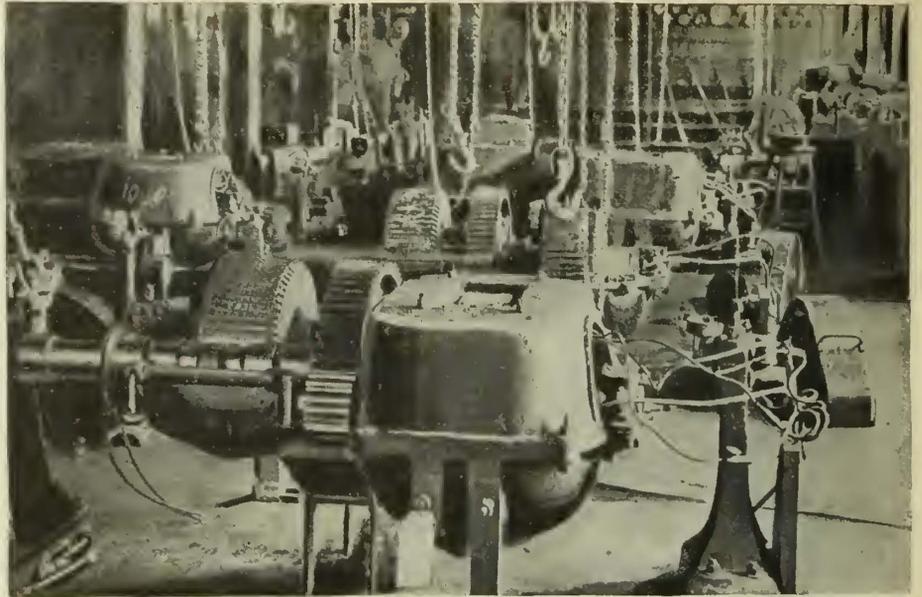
W. P. MOTORS COUPLED FOR TESTING.
